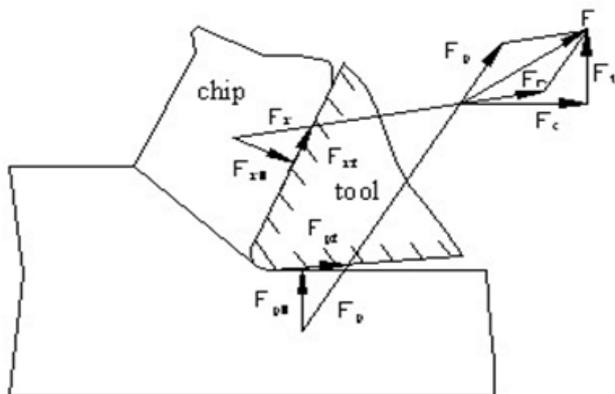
Merchant model with tool edge showing force acting on the cutting tool.
